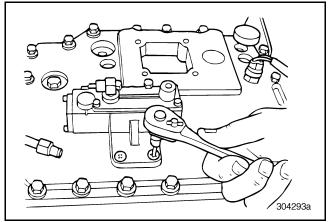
Removing Range Shift Valve Screws (Air Lines Removed for Clarity)
